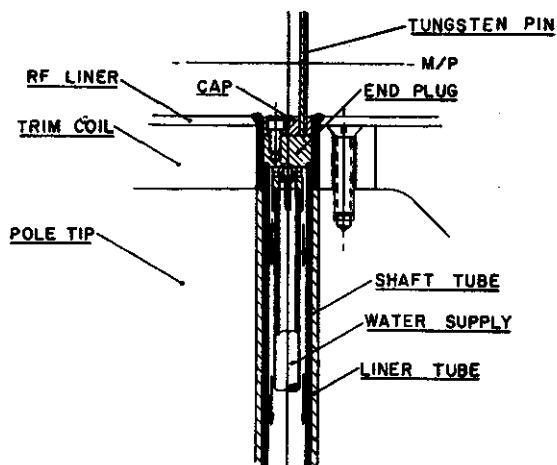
The end of the shaft at the median plane of the cyclotron. The sixty-two mil tungsten pin intercepts the unwanted beam. The pin is mounted in a copper cap which is easily removed for rapid pin change. Note; the copper end plug is water cooled so the tungsten will be indirectly cooled.
